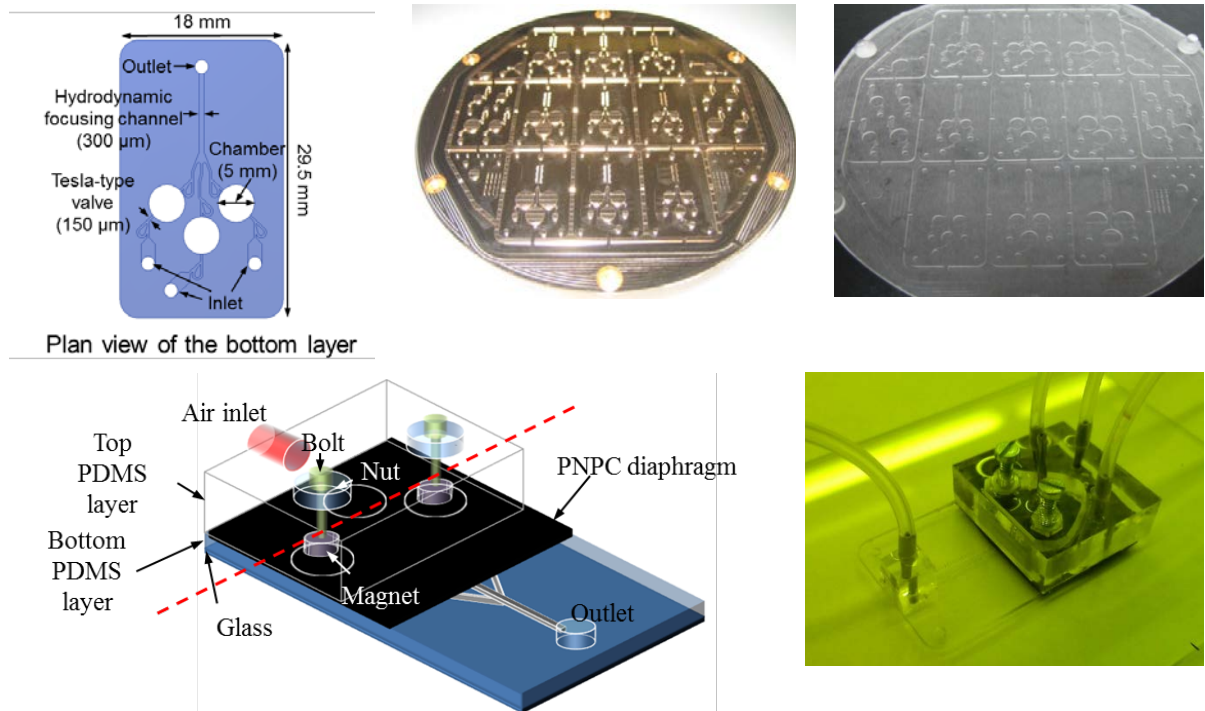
Layout of one hydrodynamic focusing module (top, left), brass mold insert (top, middle) and replicated PMMA pump housings (top, right), along with schematic of assembled module (bottom, left) and actual device (bottom, right).
